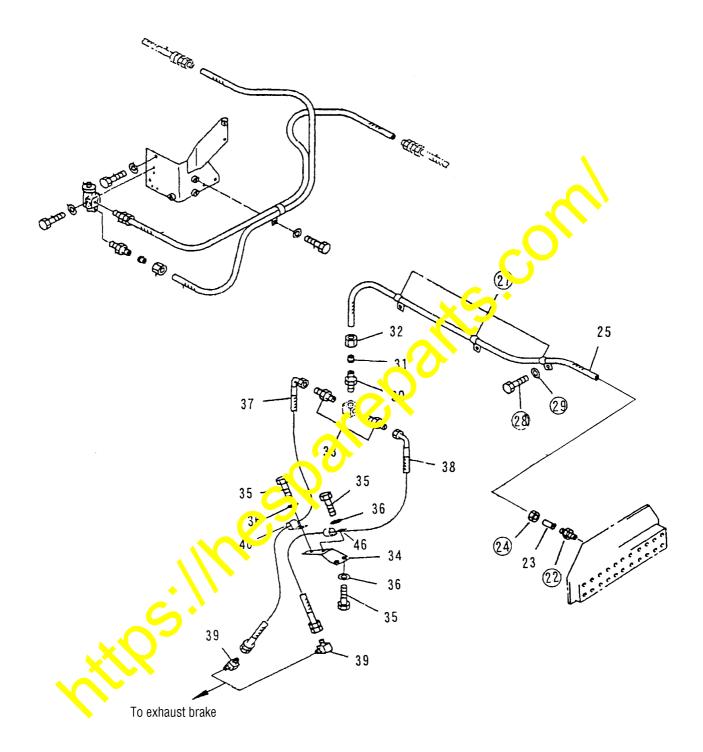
Schematic diagram for the piping parts which need to be installed for this modification (Air pipings)
